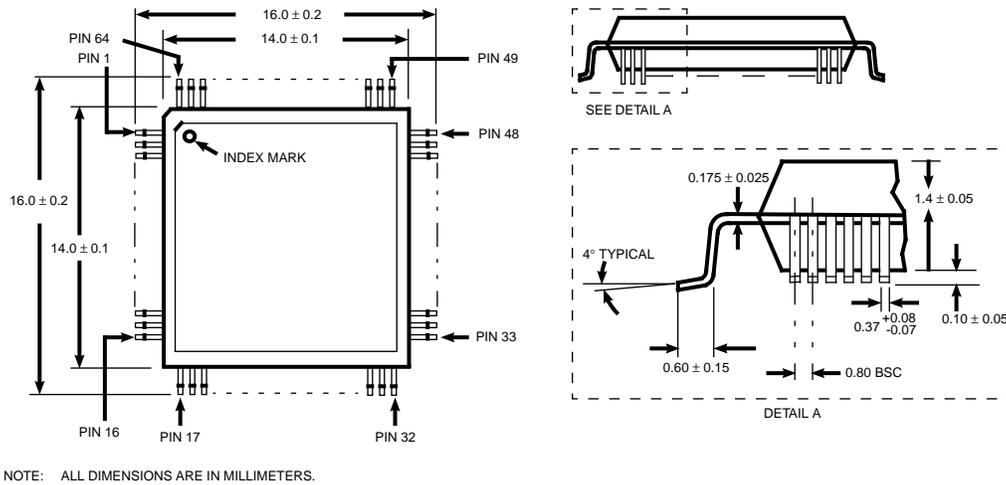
FAS209 64-Pin TQFP Mechanical Drawings
